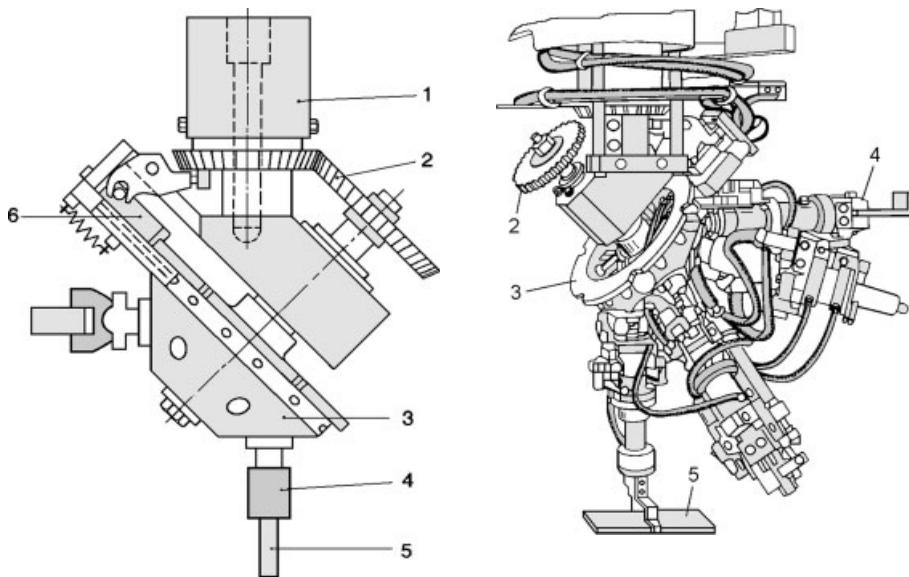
Turret with six separate grippers and joining tools (Sony)
